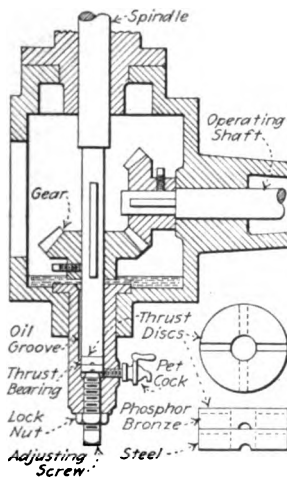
Showing adjustable thrust bearing for fly-ball governors.
